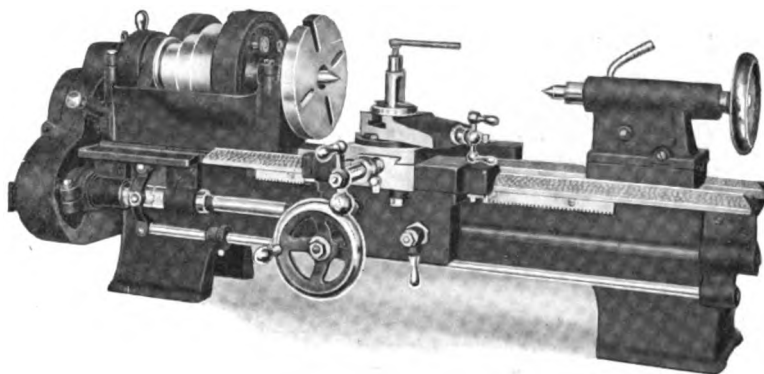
7-Inch (180 mm.) Swing Engine Lathe
